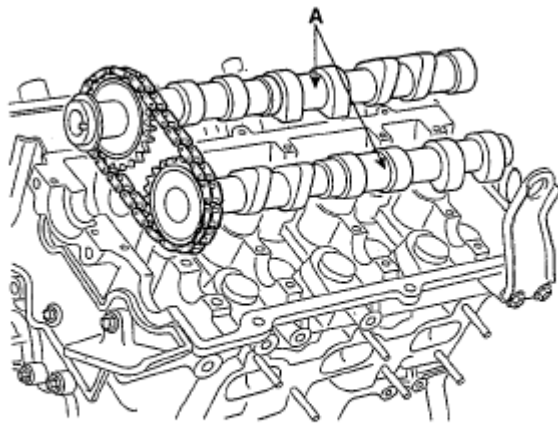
Identifying Camshaft Bearing Caps (2 Of 2)
